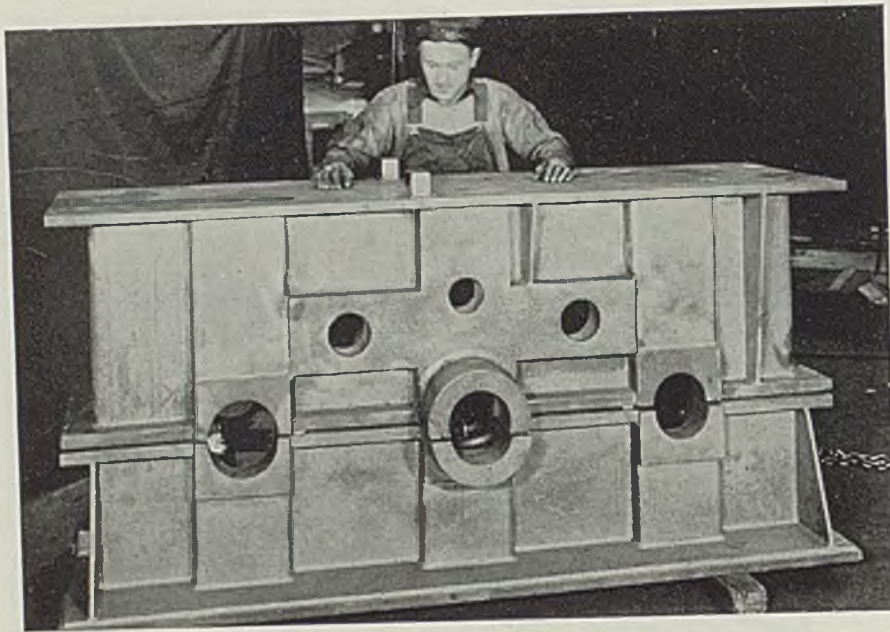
Gear case fabricated by welding. Cost summary sheet shown in Fig. 3
